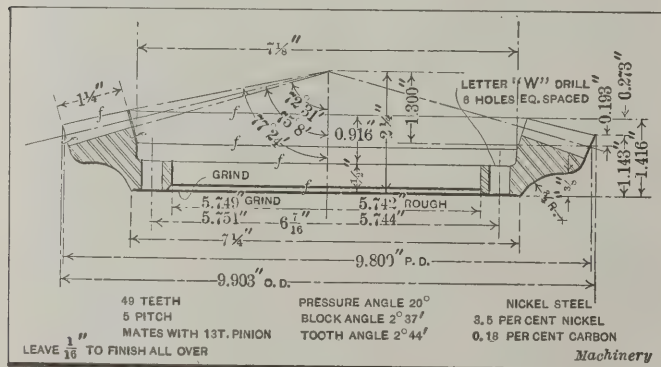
Automobile Main Drive or Ring Gear to be heat-treated
